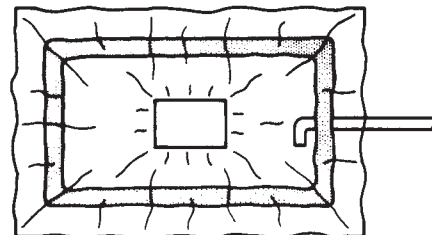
Homemade vacuum clamping fixture. Putty is formed into a shallow box shape with vacuum hose molded into side. After gage placement, a plastic film (usually mylar) is placed over putty frames, and the vacuum is applied. Normally heat lamps are used to cure elevated-temperature-curing epoxies.
